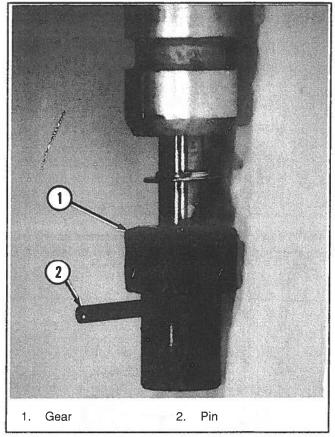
Removing Distributor-Driven Gear From Distributor
